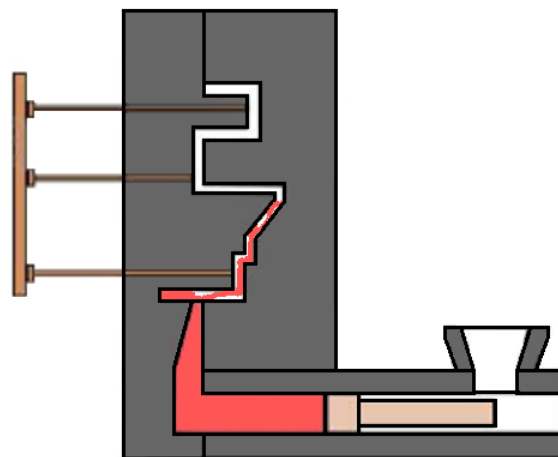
Mould filling test with vacuum, changeover point 500 mm
